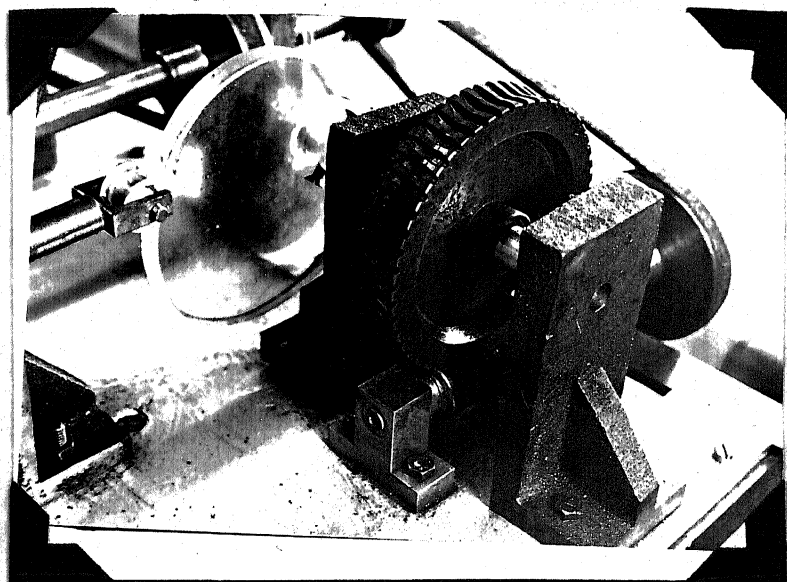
, UNIFORM WIRE WINDING UNIT
